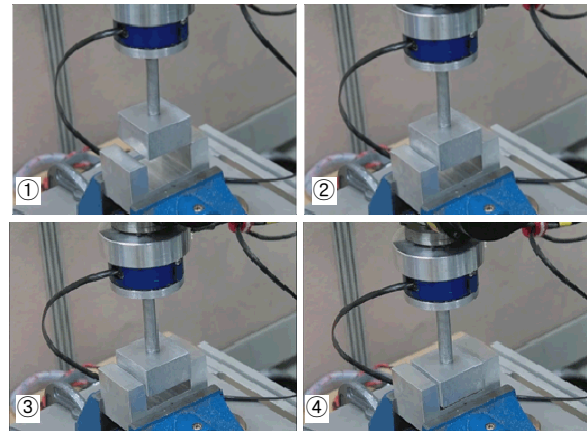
Sequences of robotic assembly using 6-DOF manipulator.
